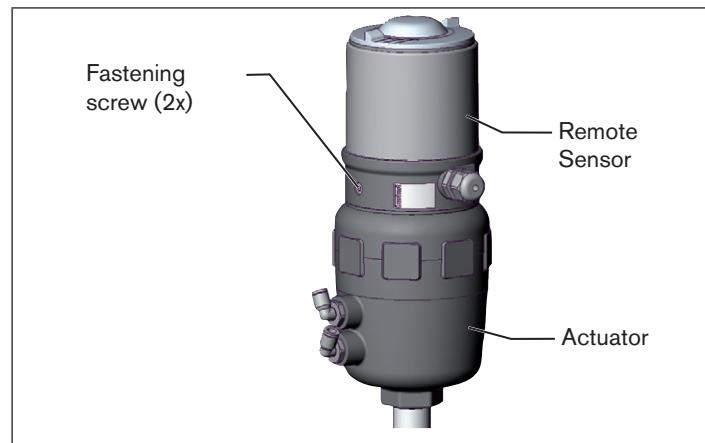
Rotating the linear Remote Sensor, series 26xx and 27xx
